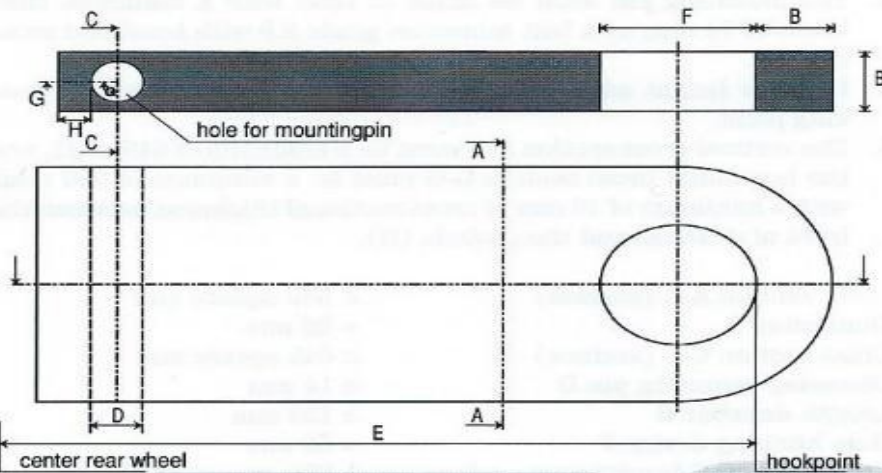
dimensions drawbar big tractors and Two Wheel Drives
